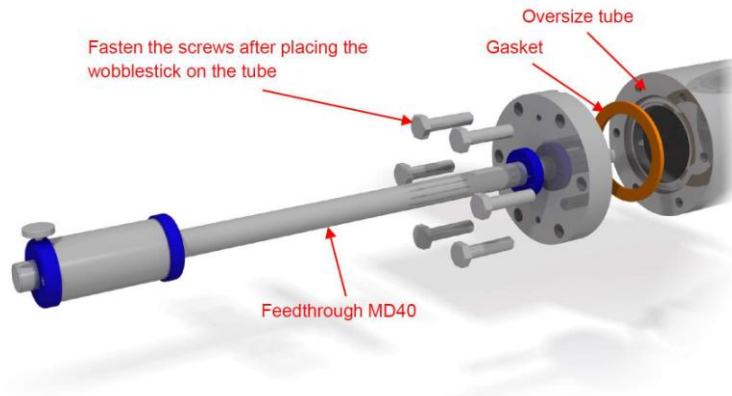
Mounting arrangement, screws used: M6x20 hex-headed or cylindrical-hex (Allen)
